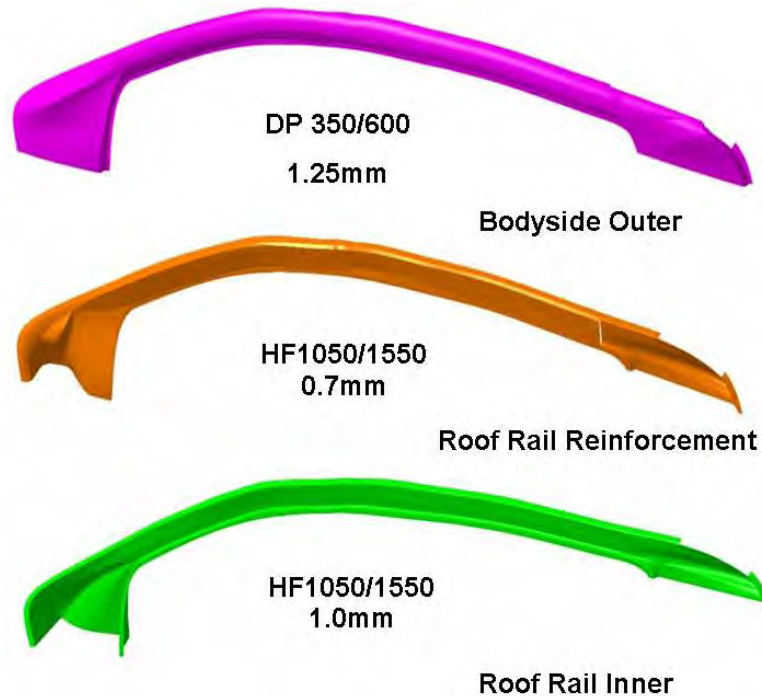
Roof rail - hot stamped solution (single gauge)
